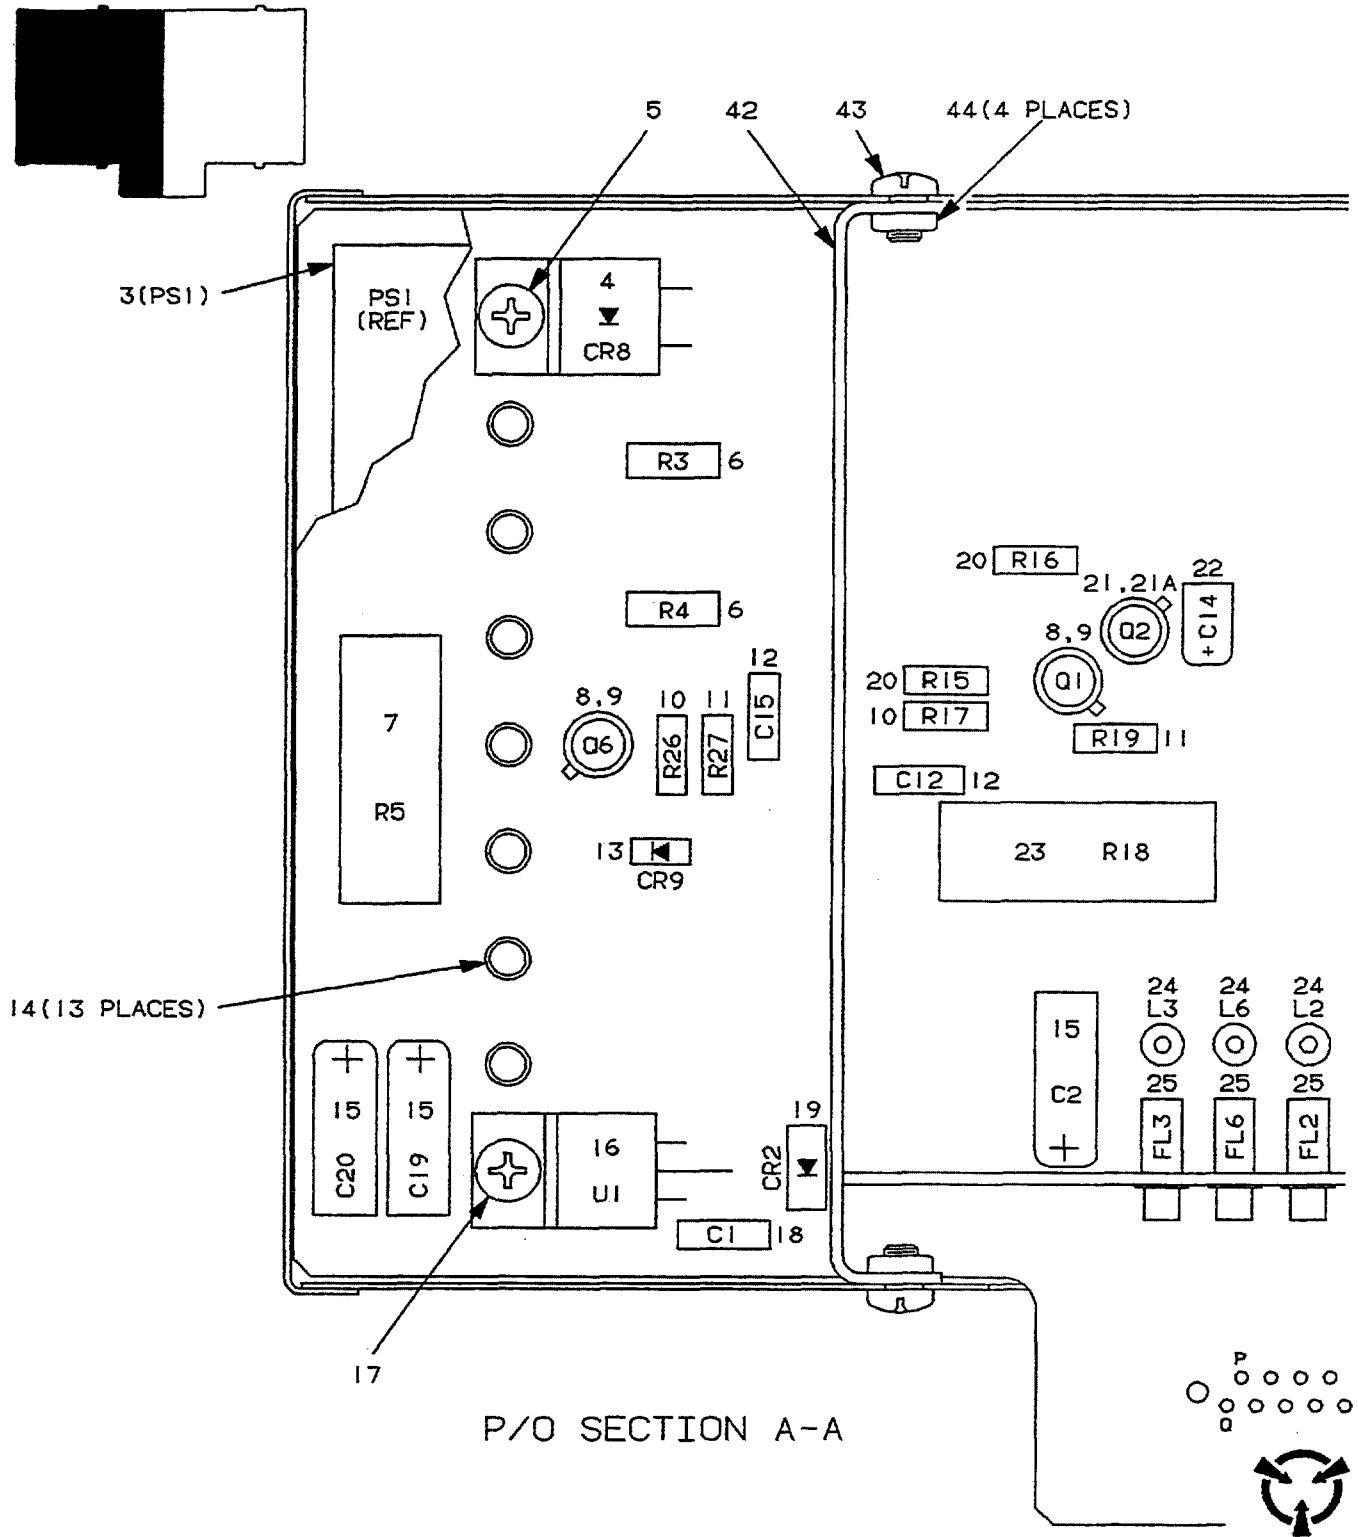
Power Supply/Audio Module Assembly (Sheet 1 of 3)
